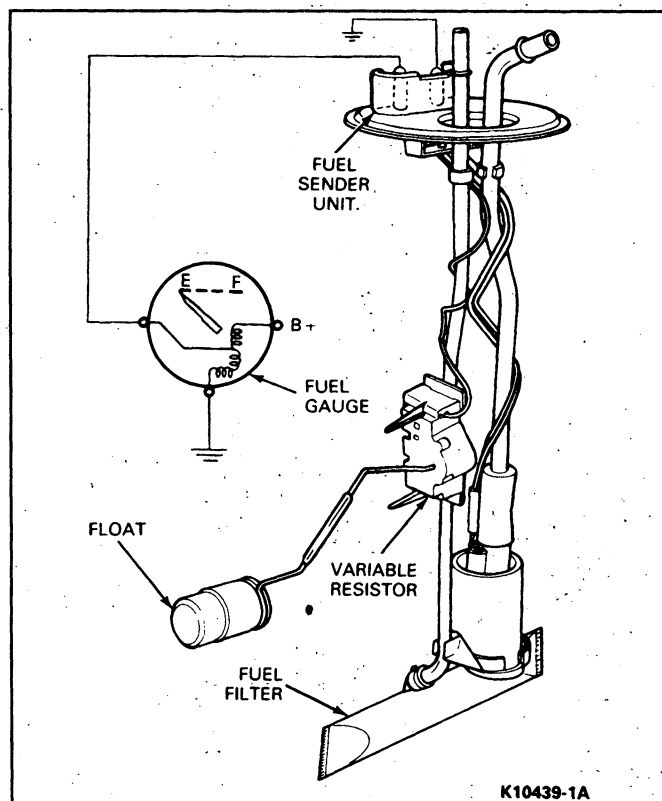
Fuel Indicating System Using a Magnetic Gauge—F-150-F-350 and F-Super Duty
